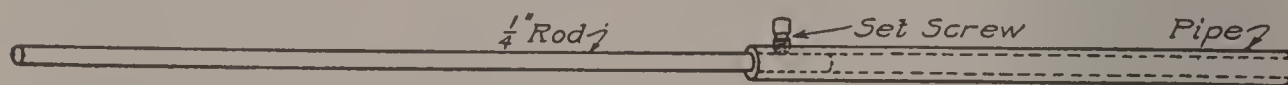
Simple Measuring Rods for Truing-Up Wheels
